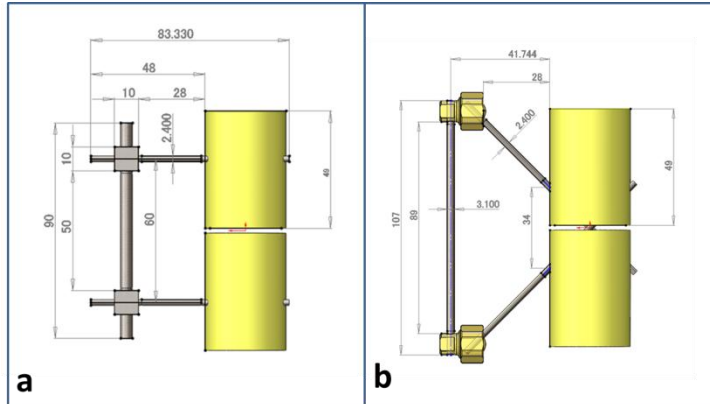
(a,b). Cantilever-frame-fixation (C.F.F.) and Truss-frame-fixation (T.F.F.). Cylinder was divided into two parts to simulate the fracture. In order to fix the fracture, the cantilever-frame-fixation (C.F.F) (Figure 4a) or the truss-frame-fixation (T.F.F) (Figure 4b) was performed.
